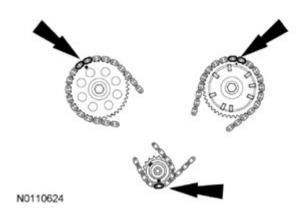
Locating Timing Marks Courtesy of FORD MOTOR CO.
